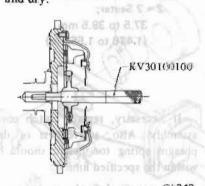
Installing Clatch Disc and Cover Assembly
